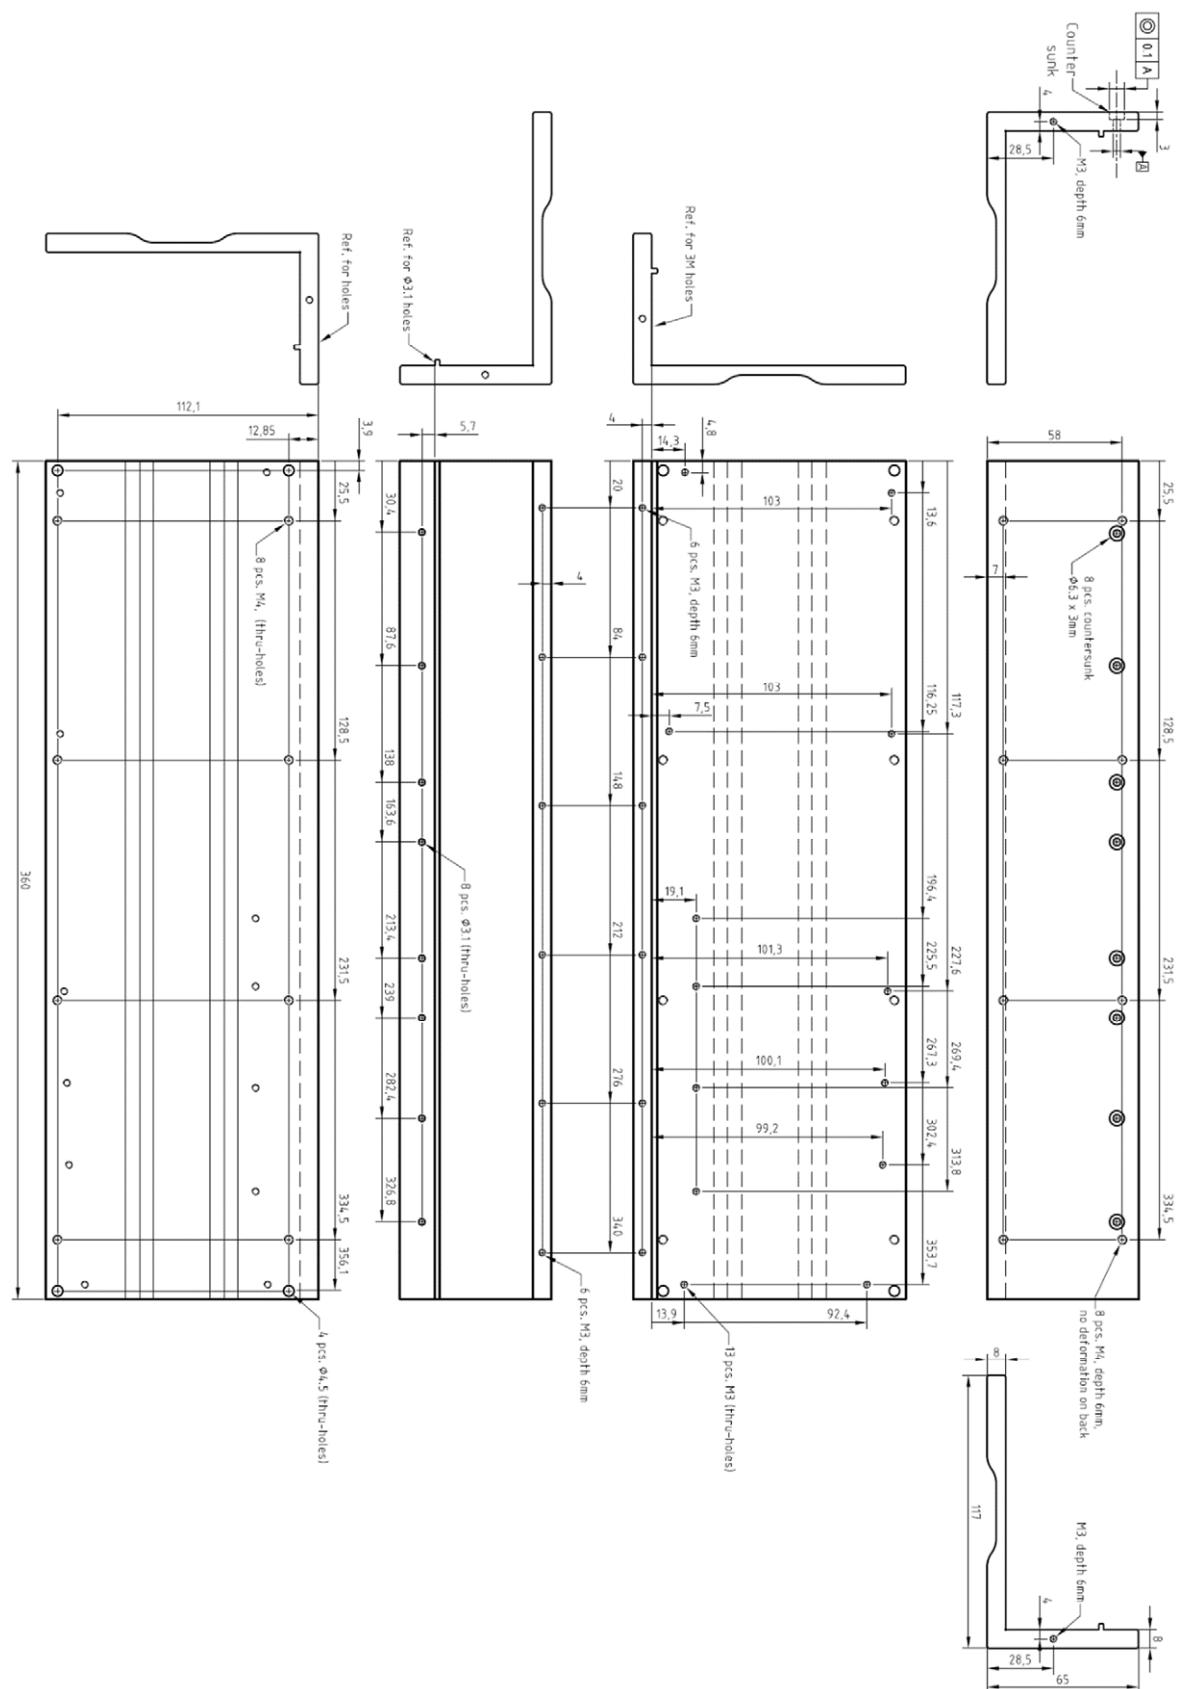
Mechanical dimensions of the X-PRO3 heat sink - All dimensions in mm
